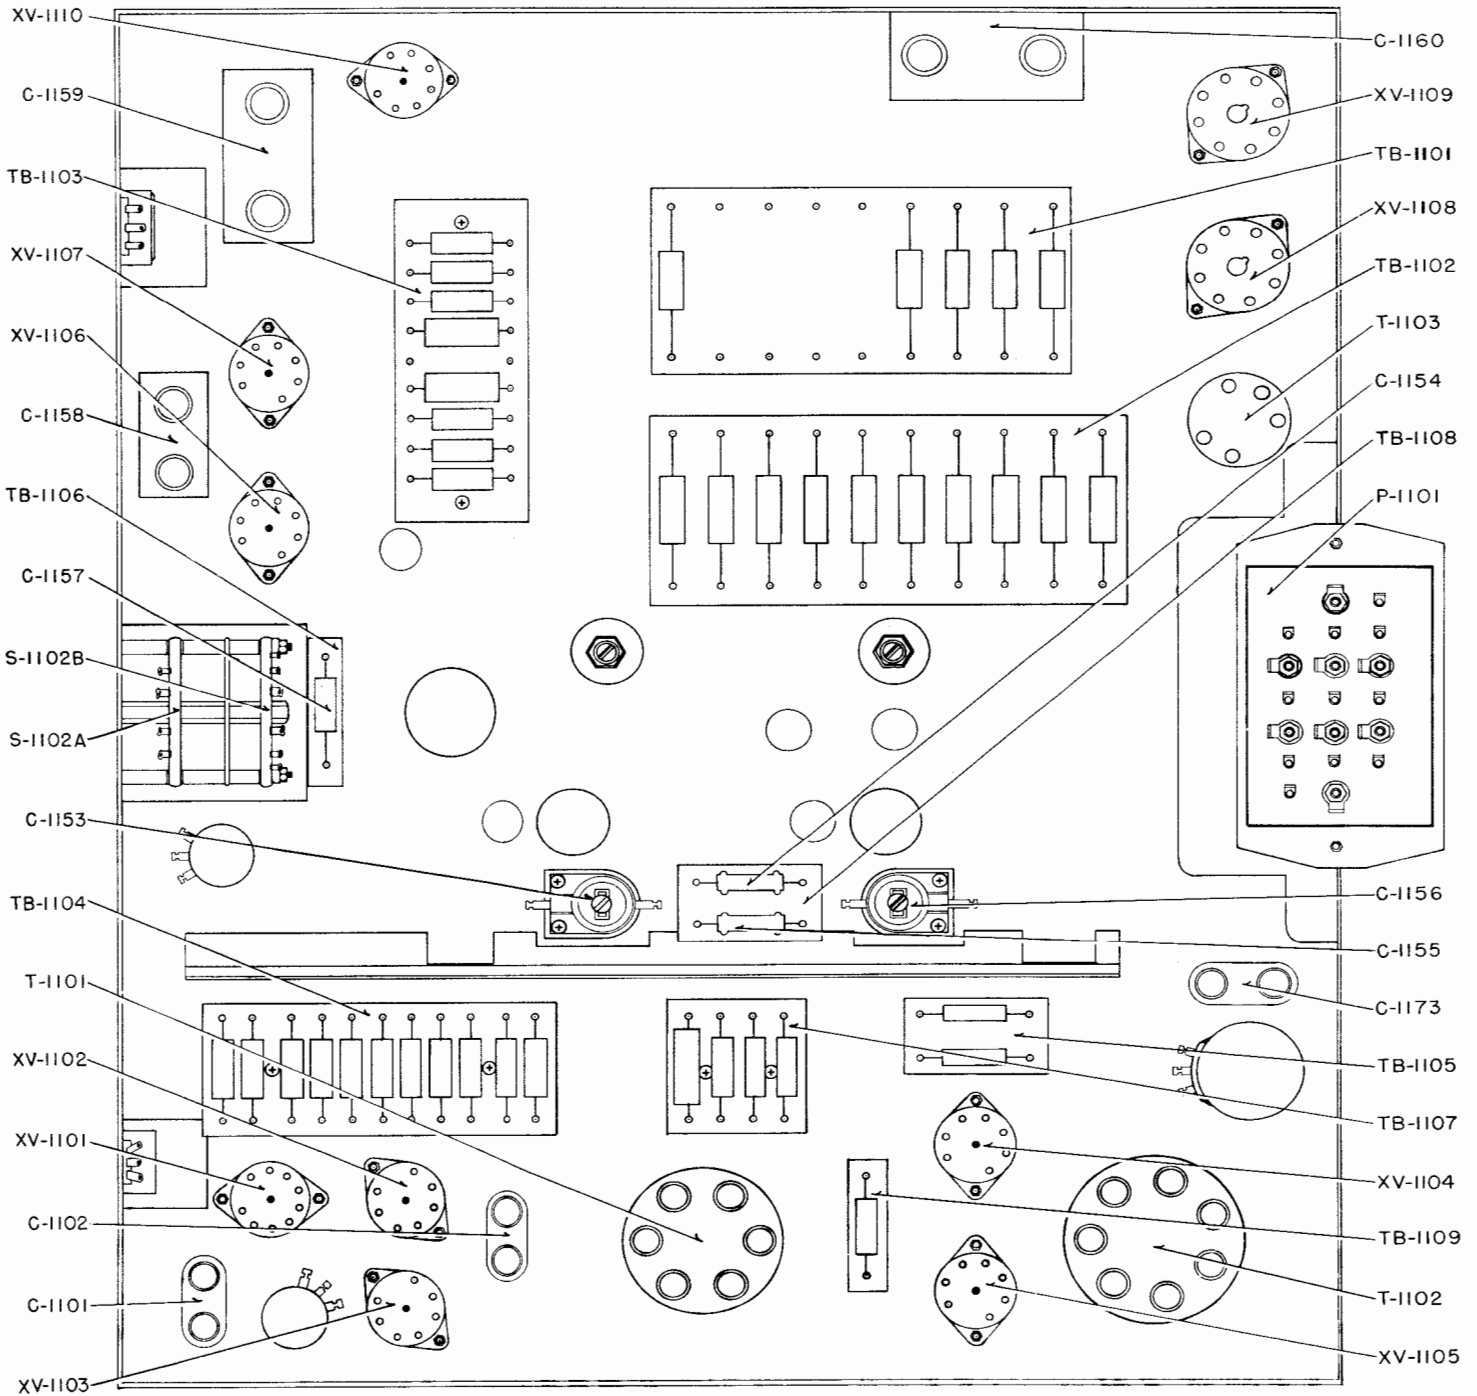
Capacitor and Miscellaneous Component Locations, Bottom of Chassis, Keyer KY-62/FRR-24
